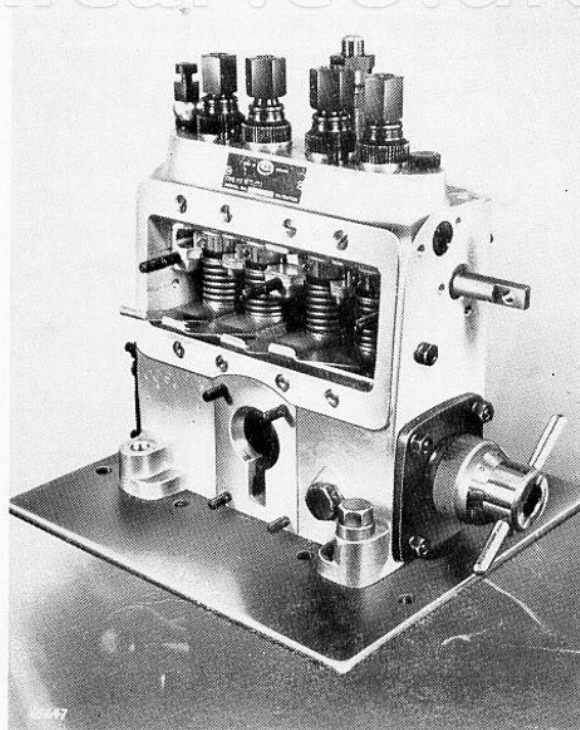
CHECKING CAMSHAFT END FLOAT USING GAUGE 7044/634—TYPICAL ILLUSTRATION
